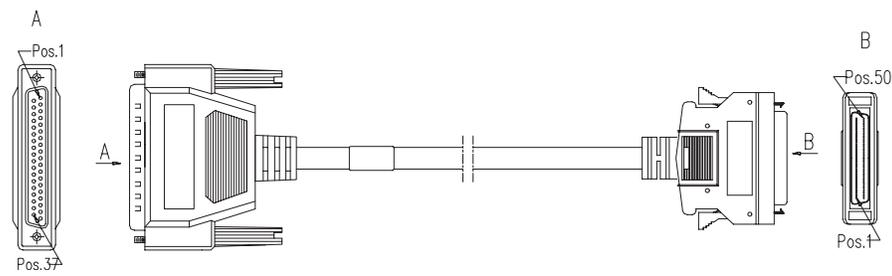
EIA/TIA-449 DTE Cable Assembly
